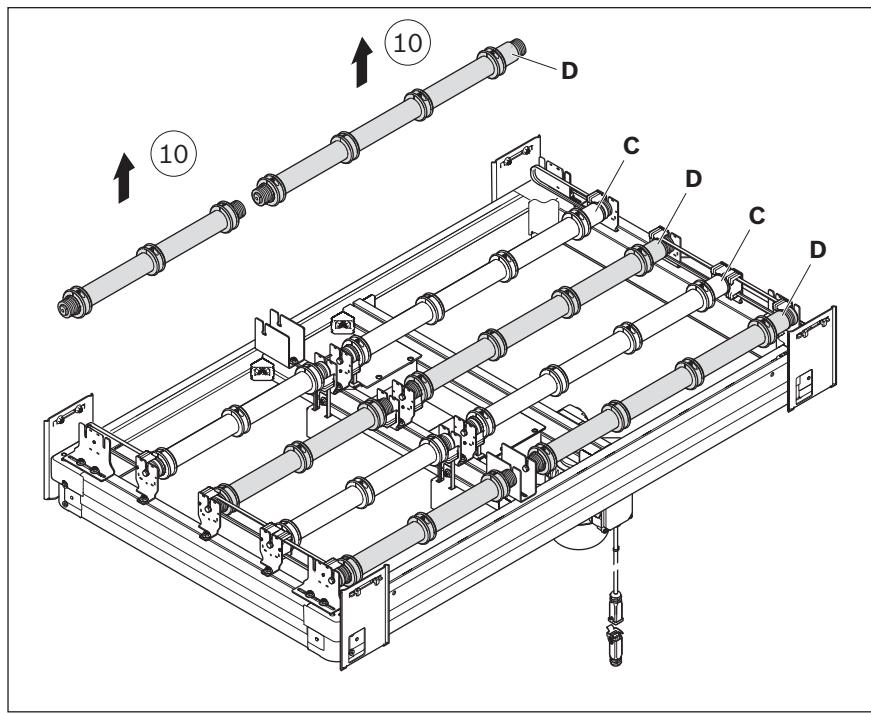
Exchanging toothed belts and/or multi V-belts, disassembly (3/3)
